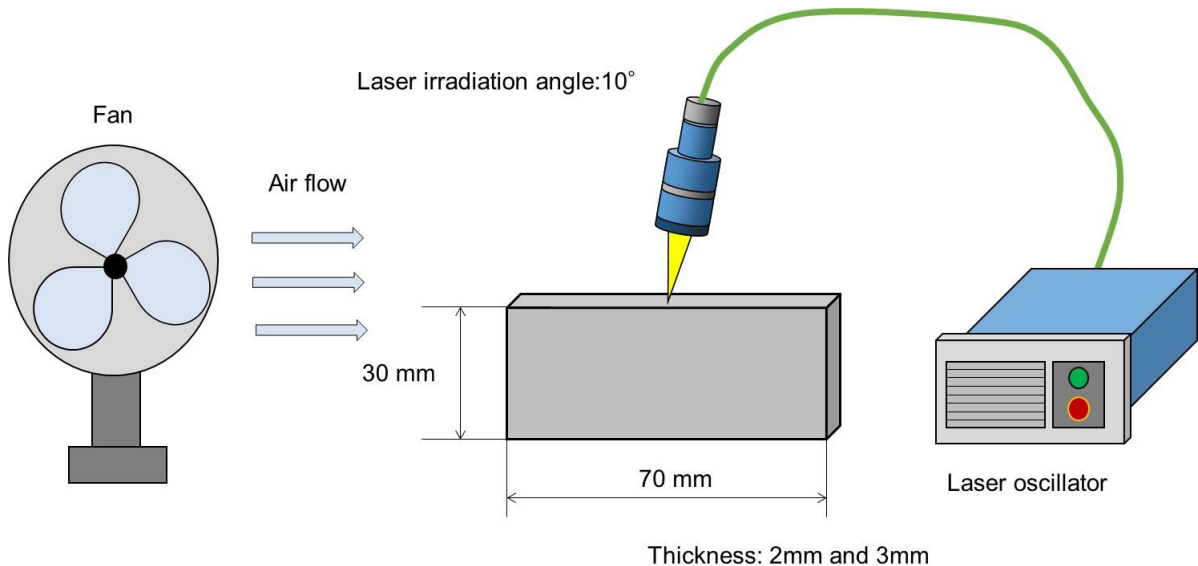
Schematic illustration of laser spot welding setting.
